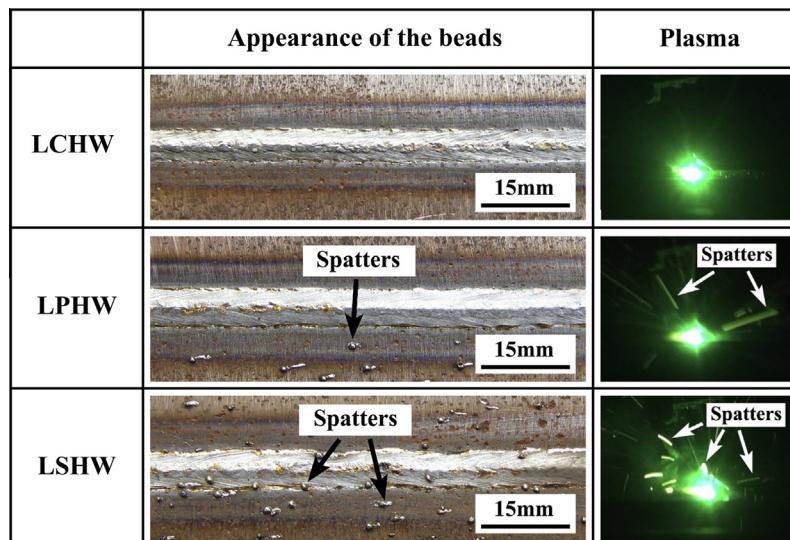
Bead appearance and plasma characterization of three hybrid welding processes.
